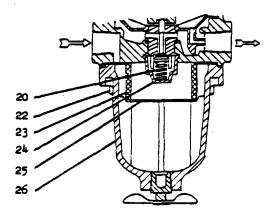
PARTIAL ASSEMBLY OF AF-2 TYPE SHOWING ADDITIONAL PARTS IN FILTER ASSEMBLY.
